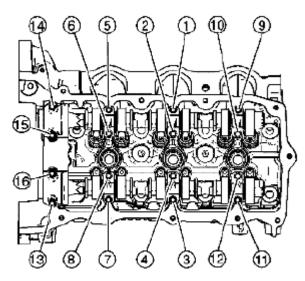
Identifying Camshaft Bearing Cap And Bolts
